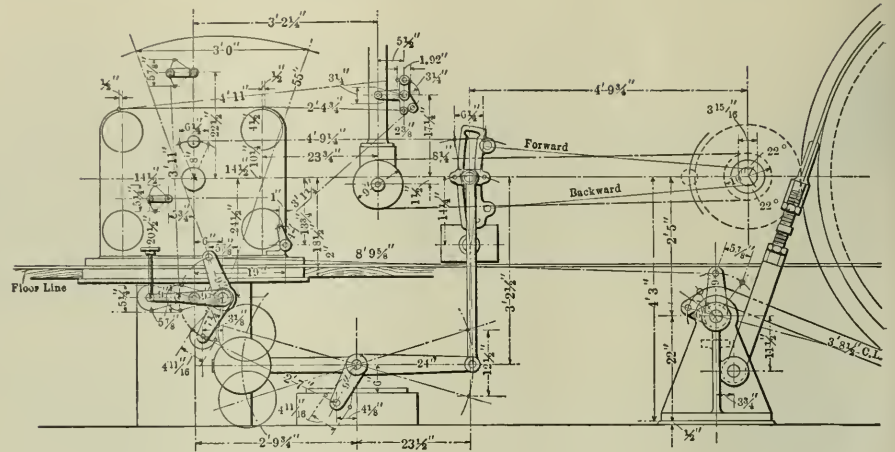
DETAIL DESIGN OF STEPHENSON GEAR ON ENGINE OF FIG. 2
